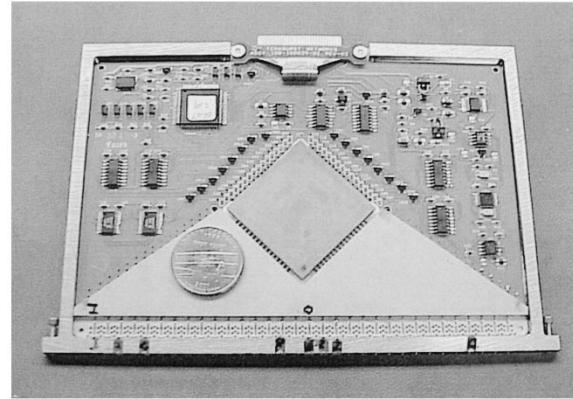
Prototype PCB incorporating the packaged switch of Fig. 19.
